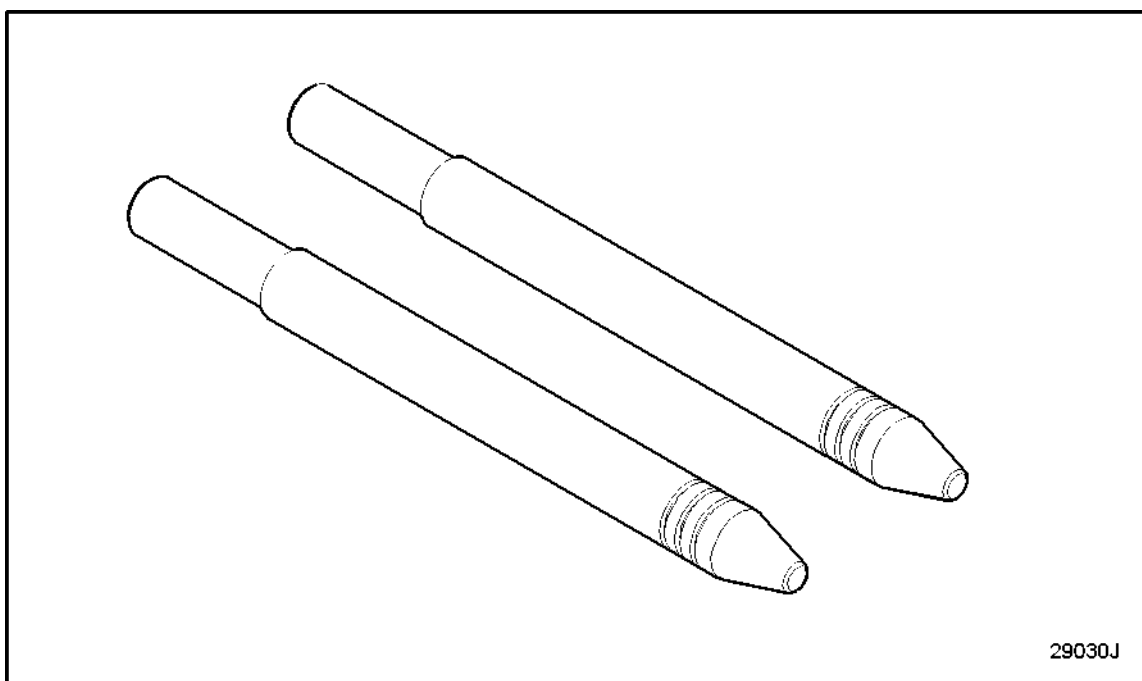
Cylinder Head Guide Studs,J 24748
